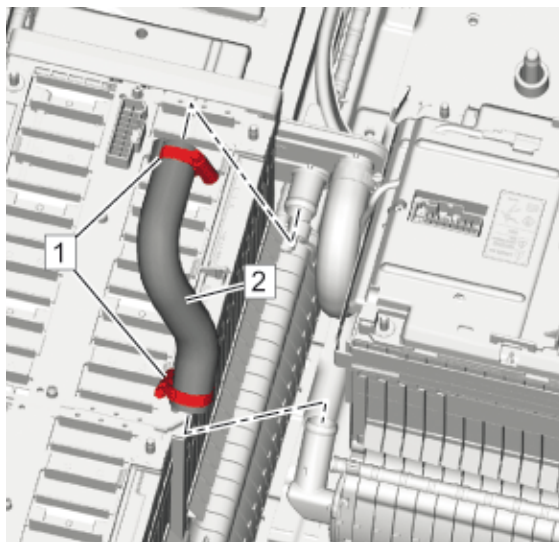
High Voltage Battery Cooling Manifold Inlet Hose And Clamps
